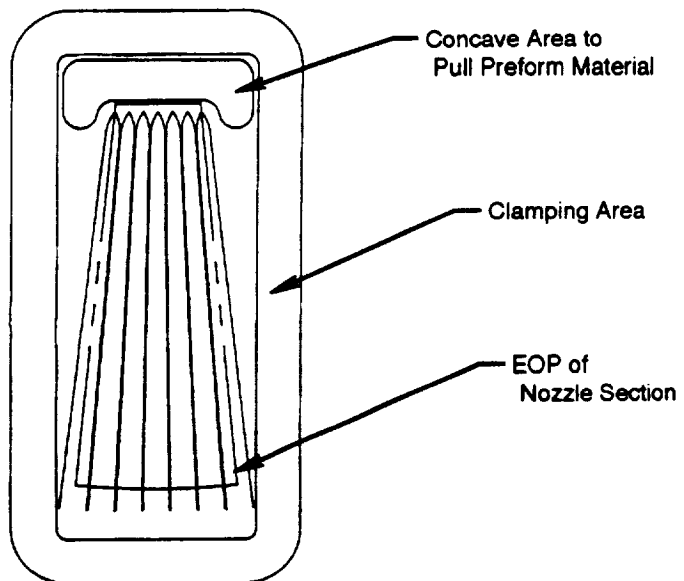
Explosior Formed Inconel 625 Sample
